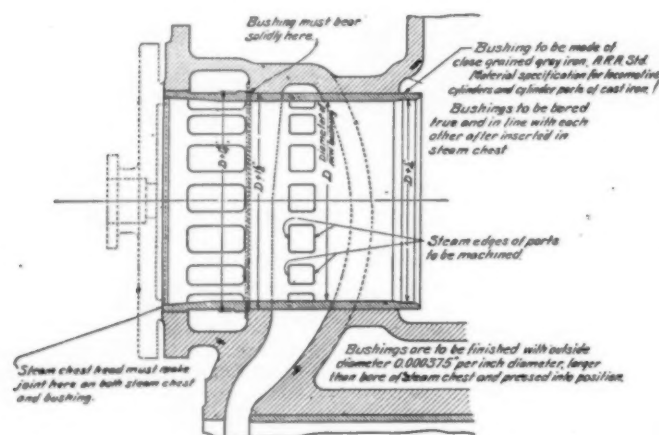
Optional Steam-Chest Bushing in Contact with Head
